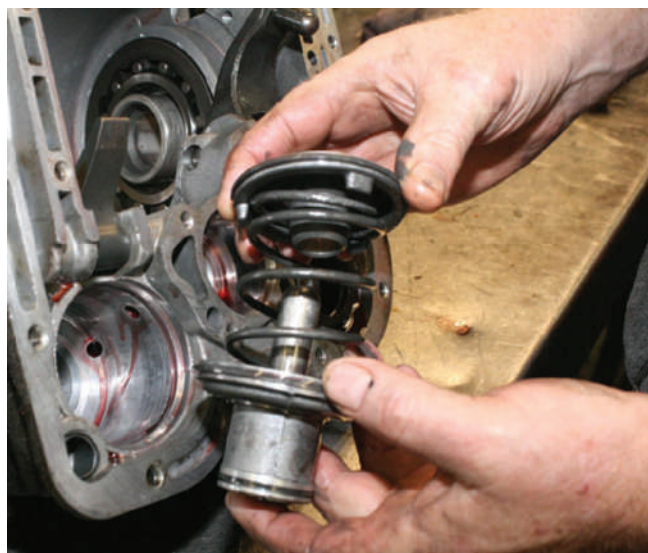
When removing the servo assembly, carefully inspect all parts.
